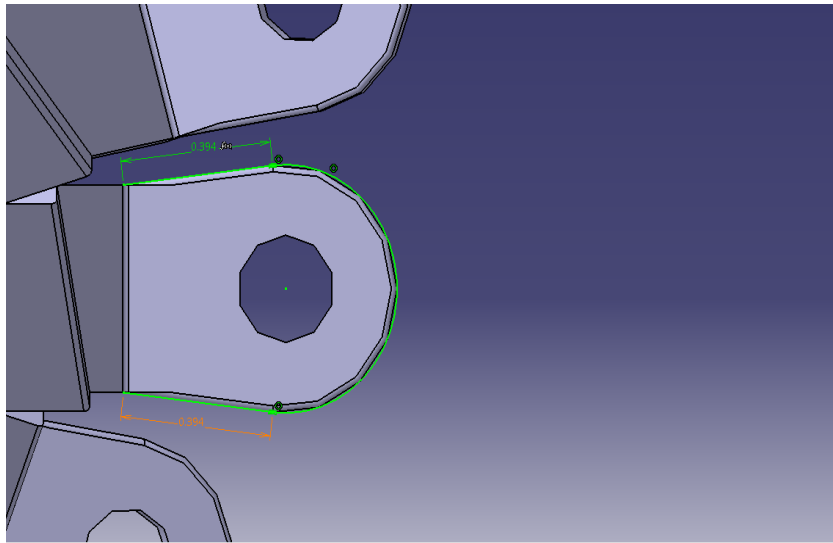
Design of the Flange Along with its Dimensions in CATIA
